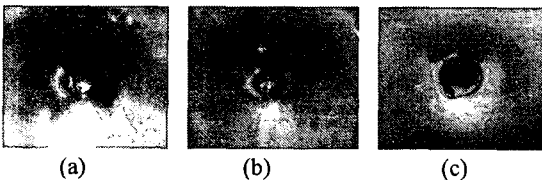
Failure mode (a) no failure, (b) upper sheet failure (impact side), (c) lower sheet failure (penetration)
